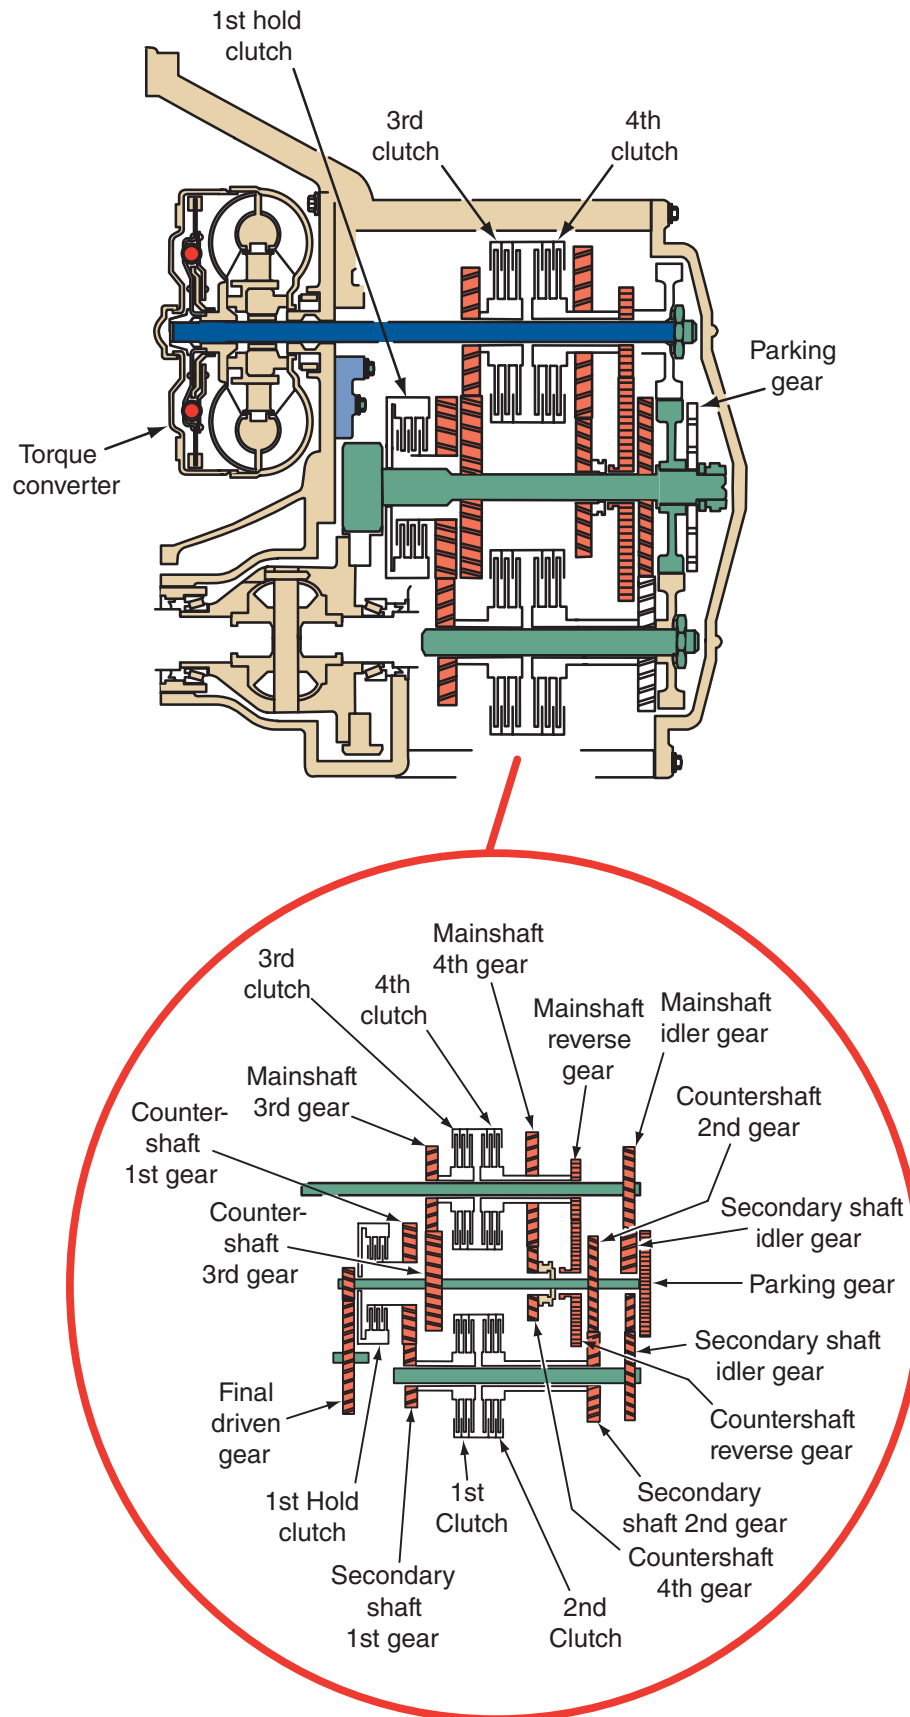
Arrangement of gears and reaction devices in a typical nonplanetary gearset transaxle.
